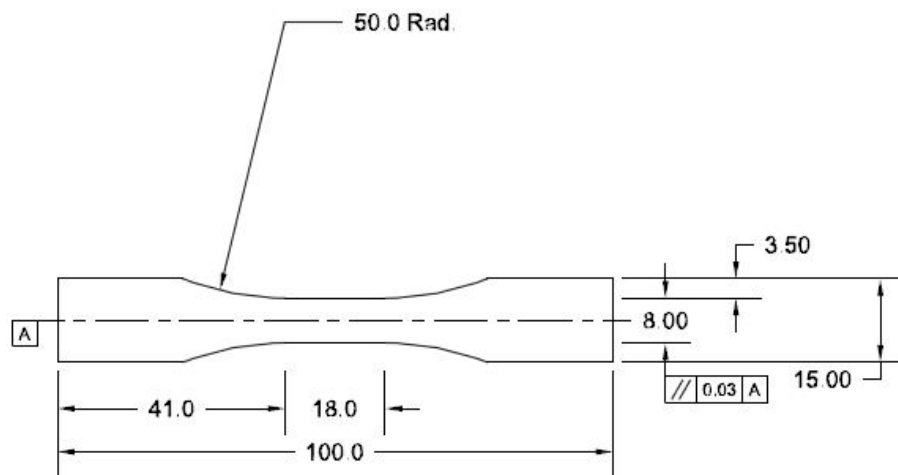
Dogbone specimen geometry. All dimensions in mm.
